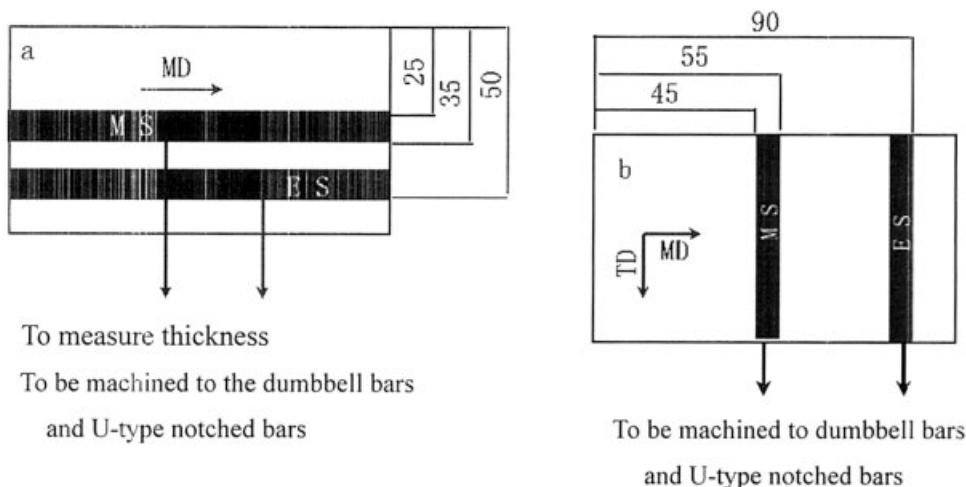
Procedure for making (a) specimens cut in the MD and (b) specimens cut in the TD.
